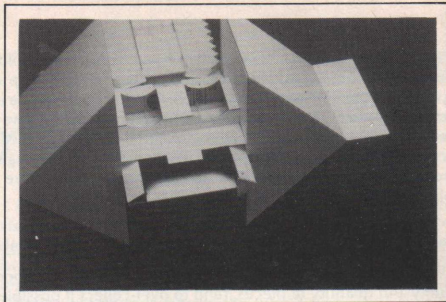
construction detail for fuel tank mounts and tail assembly detail.
